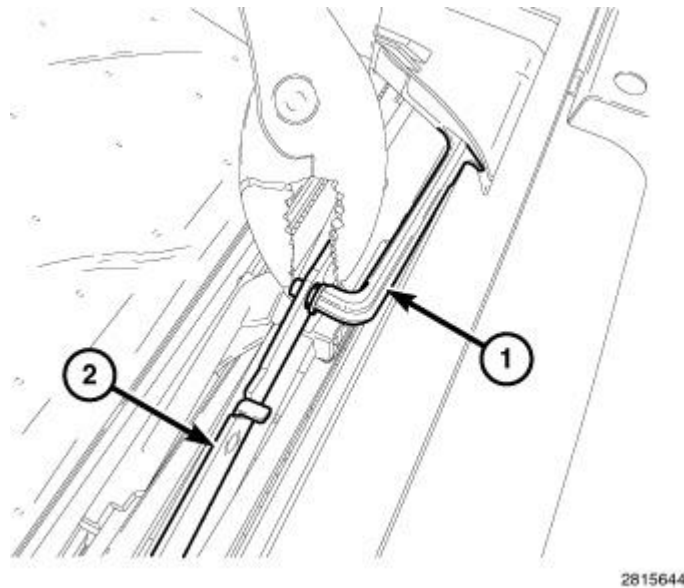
Identifying Drain Channel Arm & Guide Mechanisms
